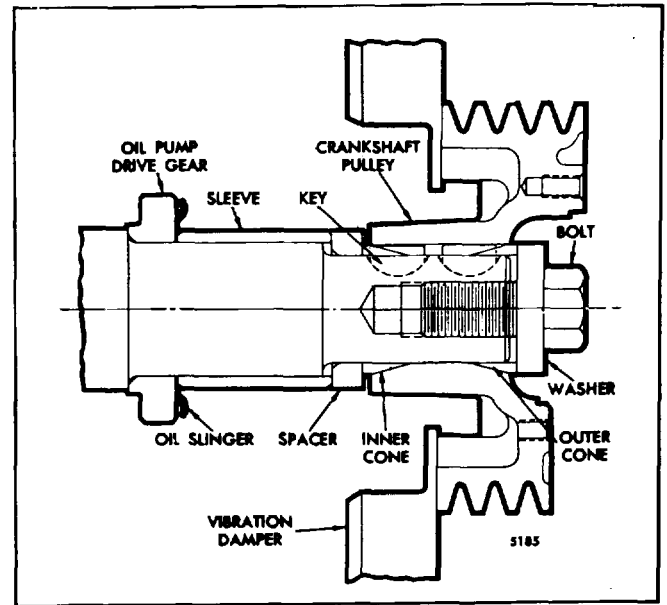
Vibration Damper and Crankshaft Pulley Assembly Mounting
